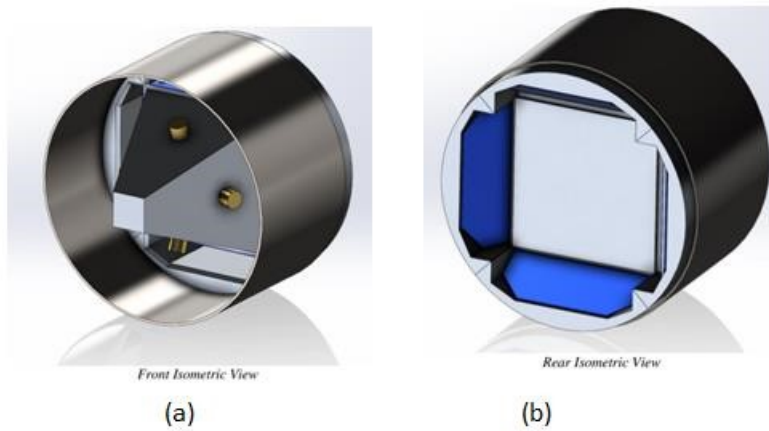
Ram style valve: a- front isometric view, b- rear isometric view
